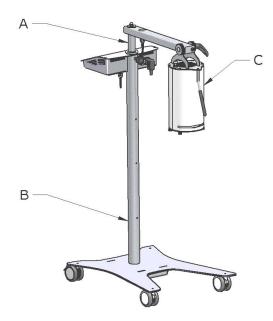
View of the assembled SOLMED lamp in the version with 1 tube on the mobile base
